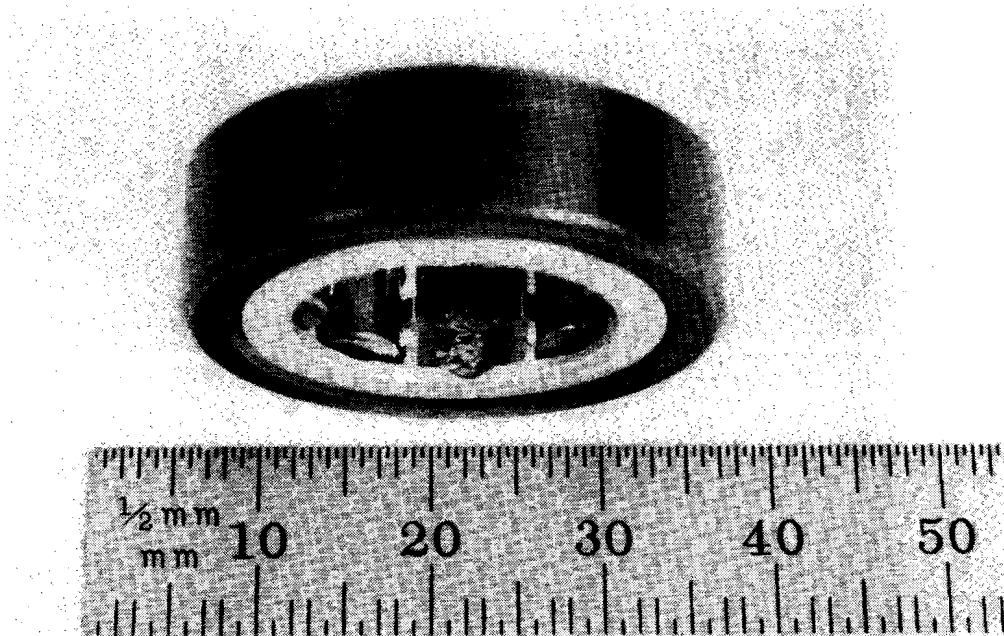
90-Degree Gearbox -409 Bearing Outer Race C/D Fault, Runs 5A + 5B
